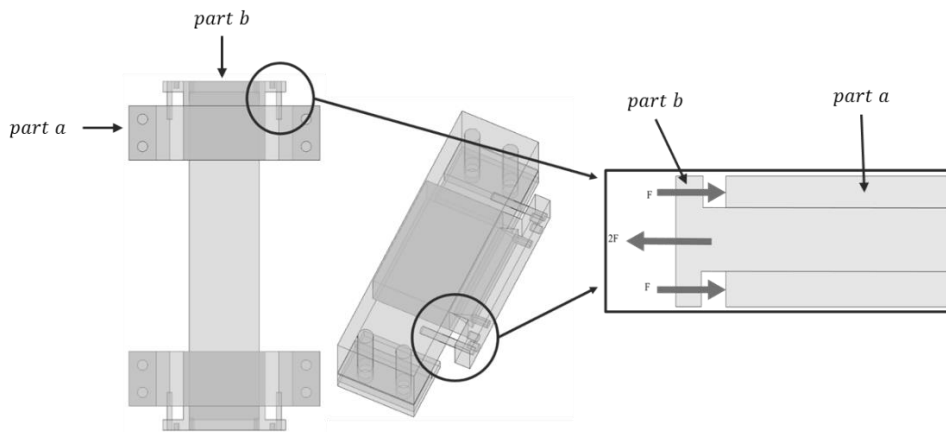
Cross-section of pre-stress bearing mechanism with forces applied by bolts to create the pre-stress
